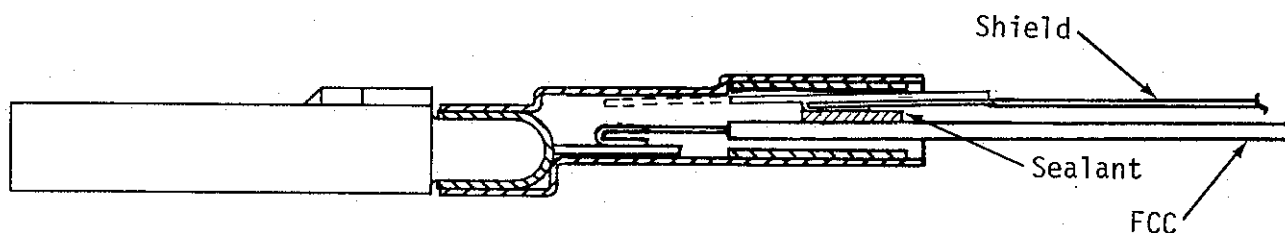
CTA-0055 Sealant Inserted Between FCC and Shield (Shield Above)
